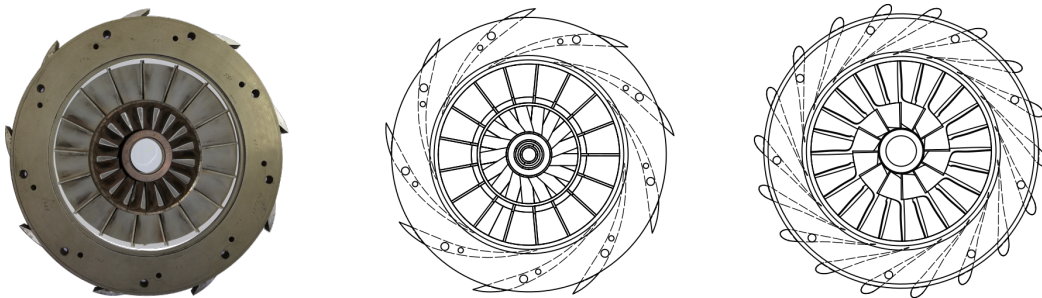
Current Compressor (left), Current Compressor Drawing (middle) & New Compressor Drawing (right)
